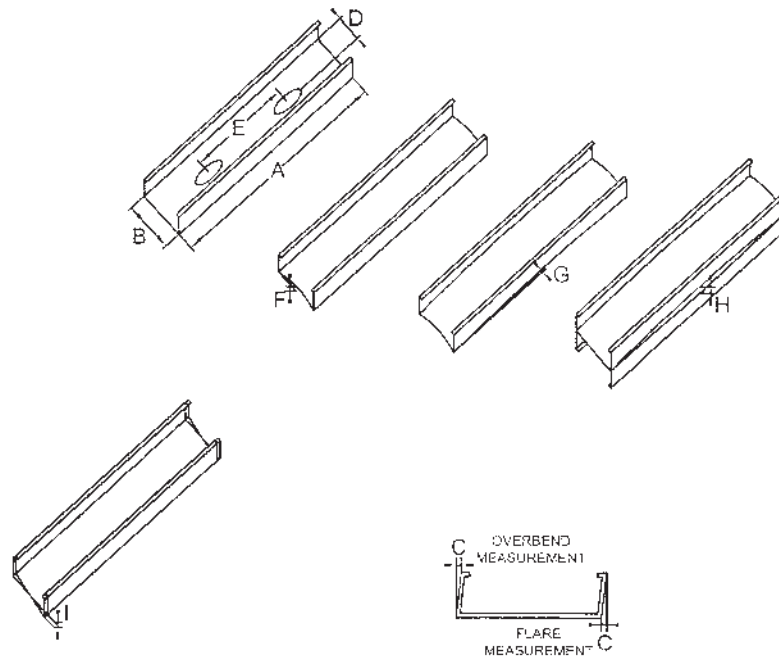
Manufacturing tolerances.<sup>1.400</sup>
